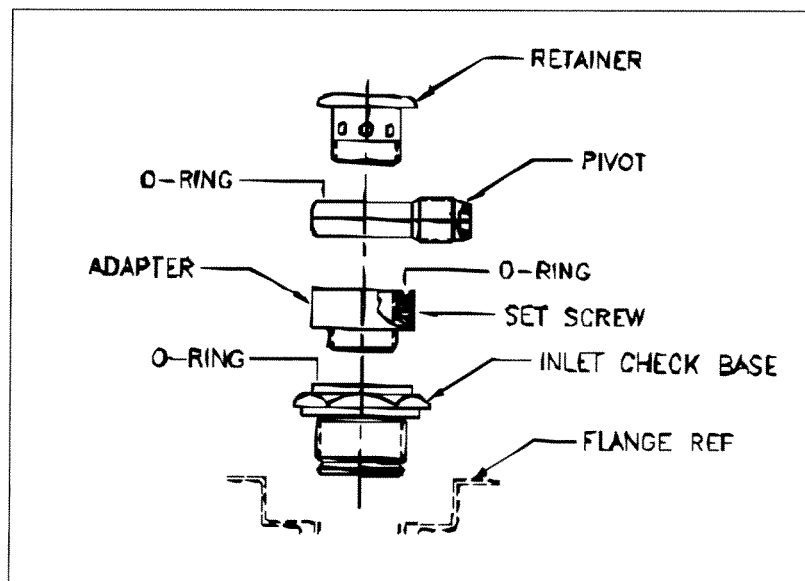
INLET CHECK/TOPPING-OFF VALVE
